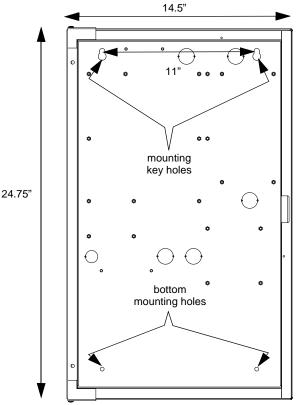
Amplifier Cabinet Flush-Mount Dimensions and Mounting Hole Locations
